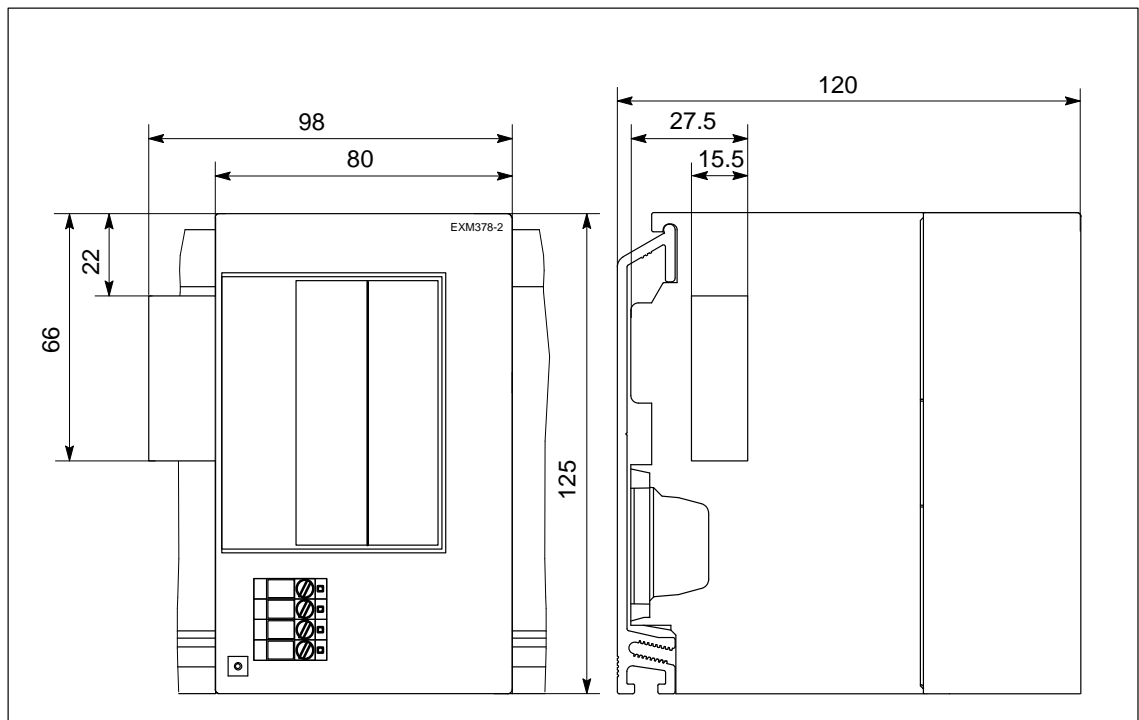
Dimension Drawing of Expansion Module EXM 378-2
